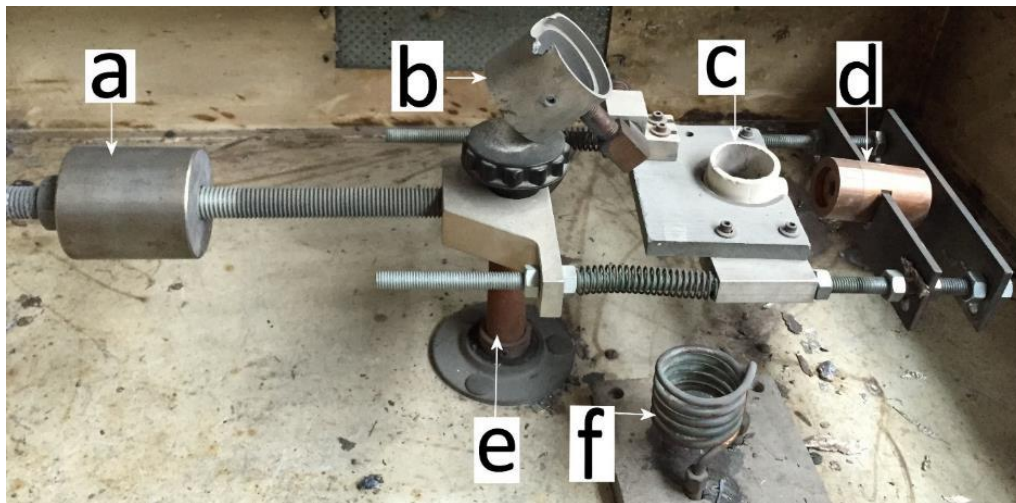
Rotocaster assembly. (a) Counter weight. (b) Protective gas cover lid. (c) Crucible. (d) Mould. (e) Central shaft, rotating axis. (f) Induction coil.
